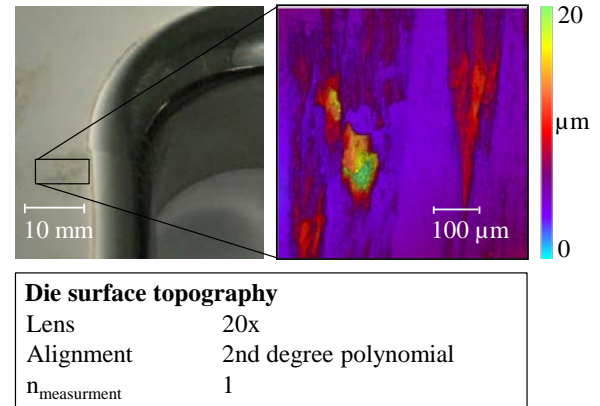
Adhesive wear of die surface after dry deep drawing of AA5182
